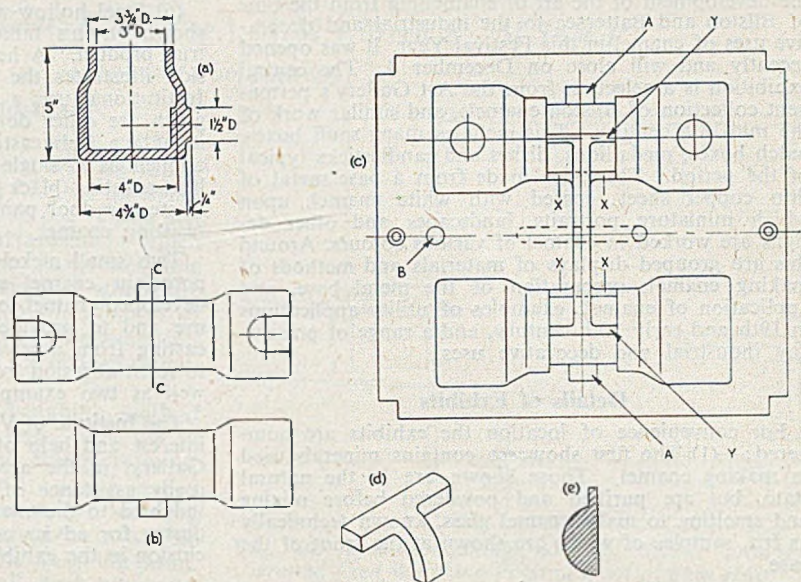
(a) Section through the Iron Casting Required; (b) Two Halves of the Core; (c) Layout of the Patterns mounted on a Machined Steel Pattern-plate; (d) Enlarged View of Ingate Y-Y and (e) Section through C-C.
